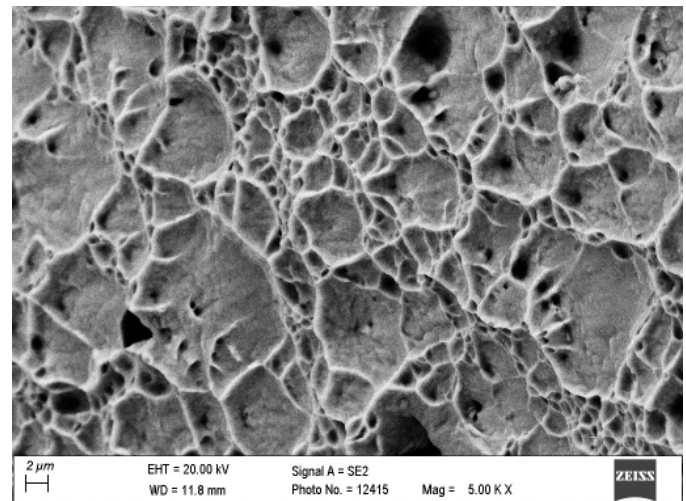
Fracture surface of CuSn10 alloy after KOBO
